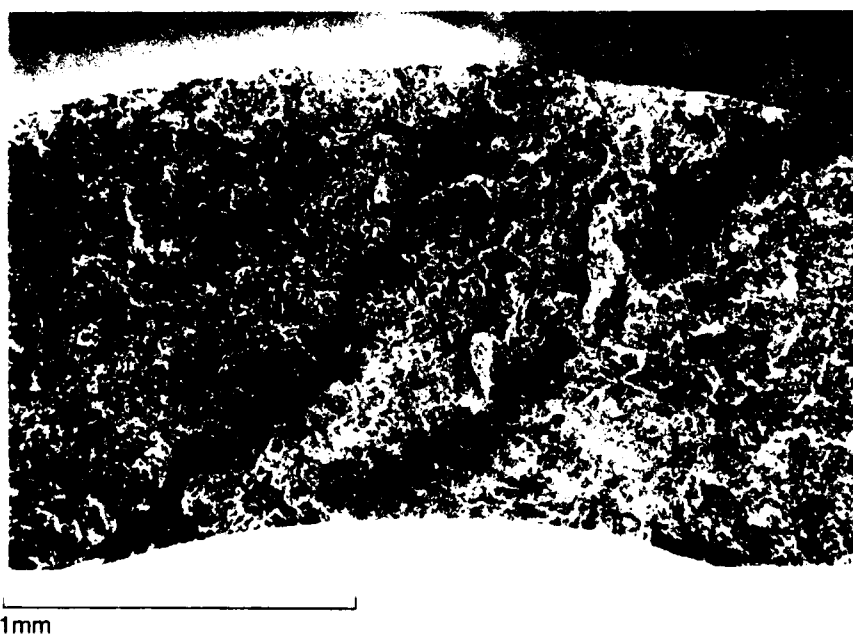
Ti-24Al-11Nb Out-of-Phase TMF Fracture Surface and Side of Gage Showing Secondary Cracking Near Origin
